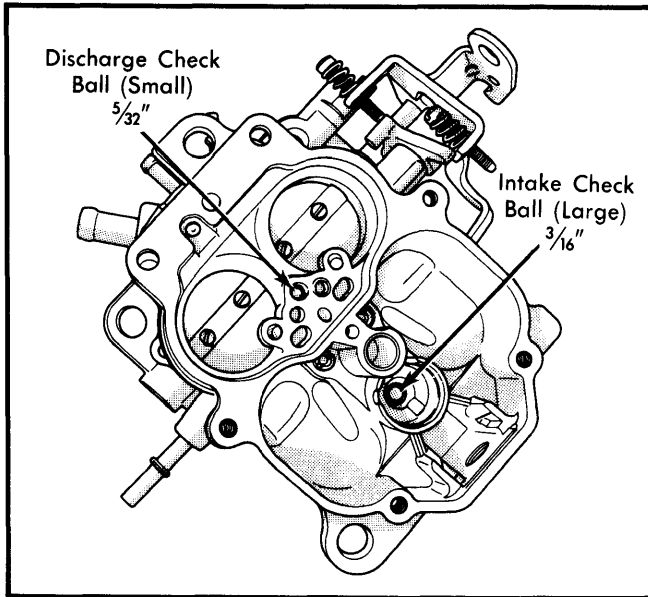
Installing Accelerator Pump Intake and Discharge Check Balls
